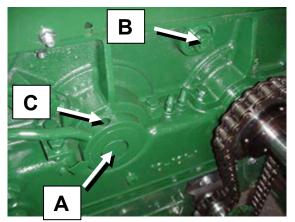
A - Rollermill Bearings, B - Agitator Shaft Bearings, C - Eccentric Housing
